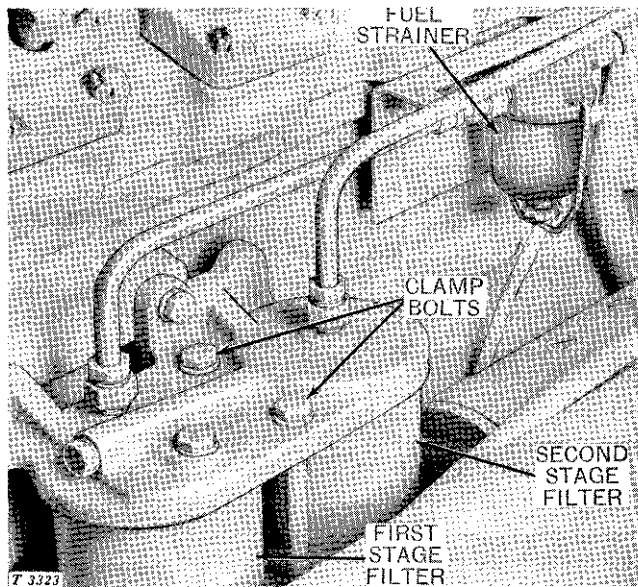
Fuel Strainer and Fuel Filters (-42000)
